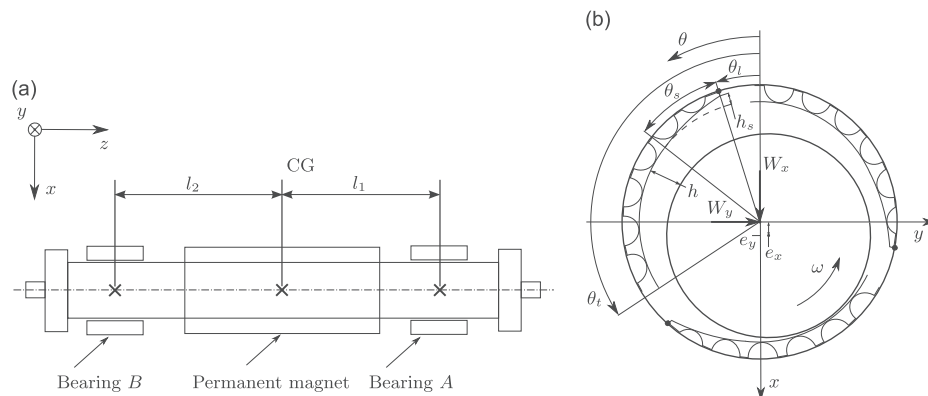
Schematics and nomenclature of a rigid rotor supported by foil journal bearings: (a) Shaft and bearings; (b) Detailed view of bearing geometry.
